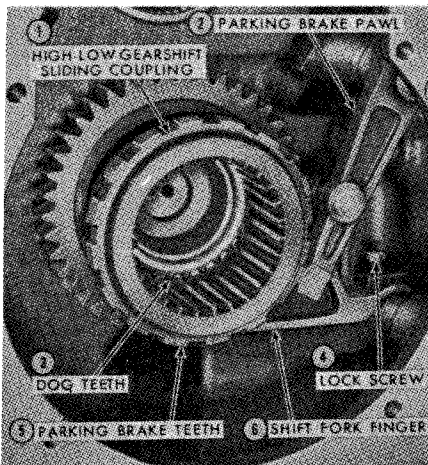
View of rear end of transmission with output shaft and secondary countershaft removed. Note brake pawl engaged with high/low sliding coupling.
